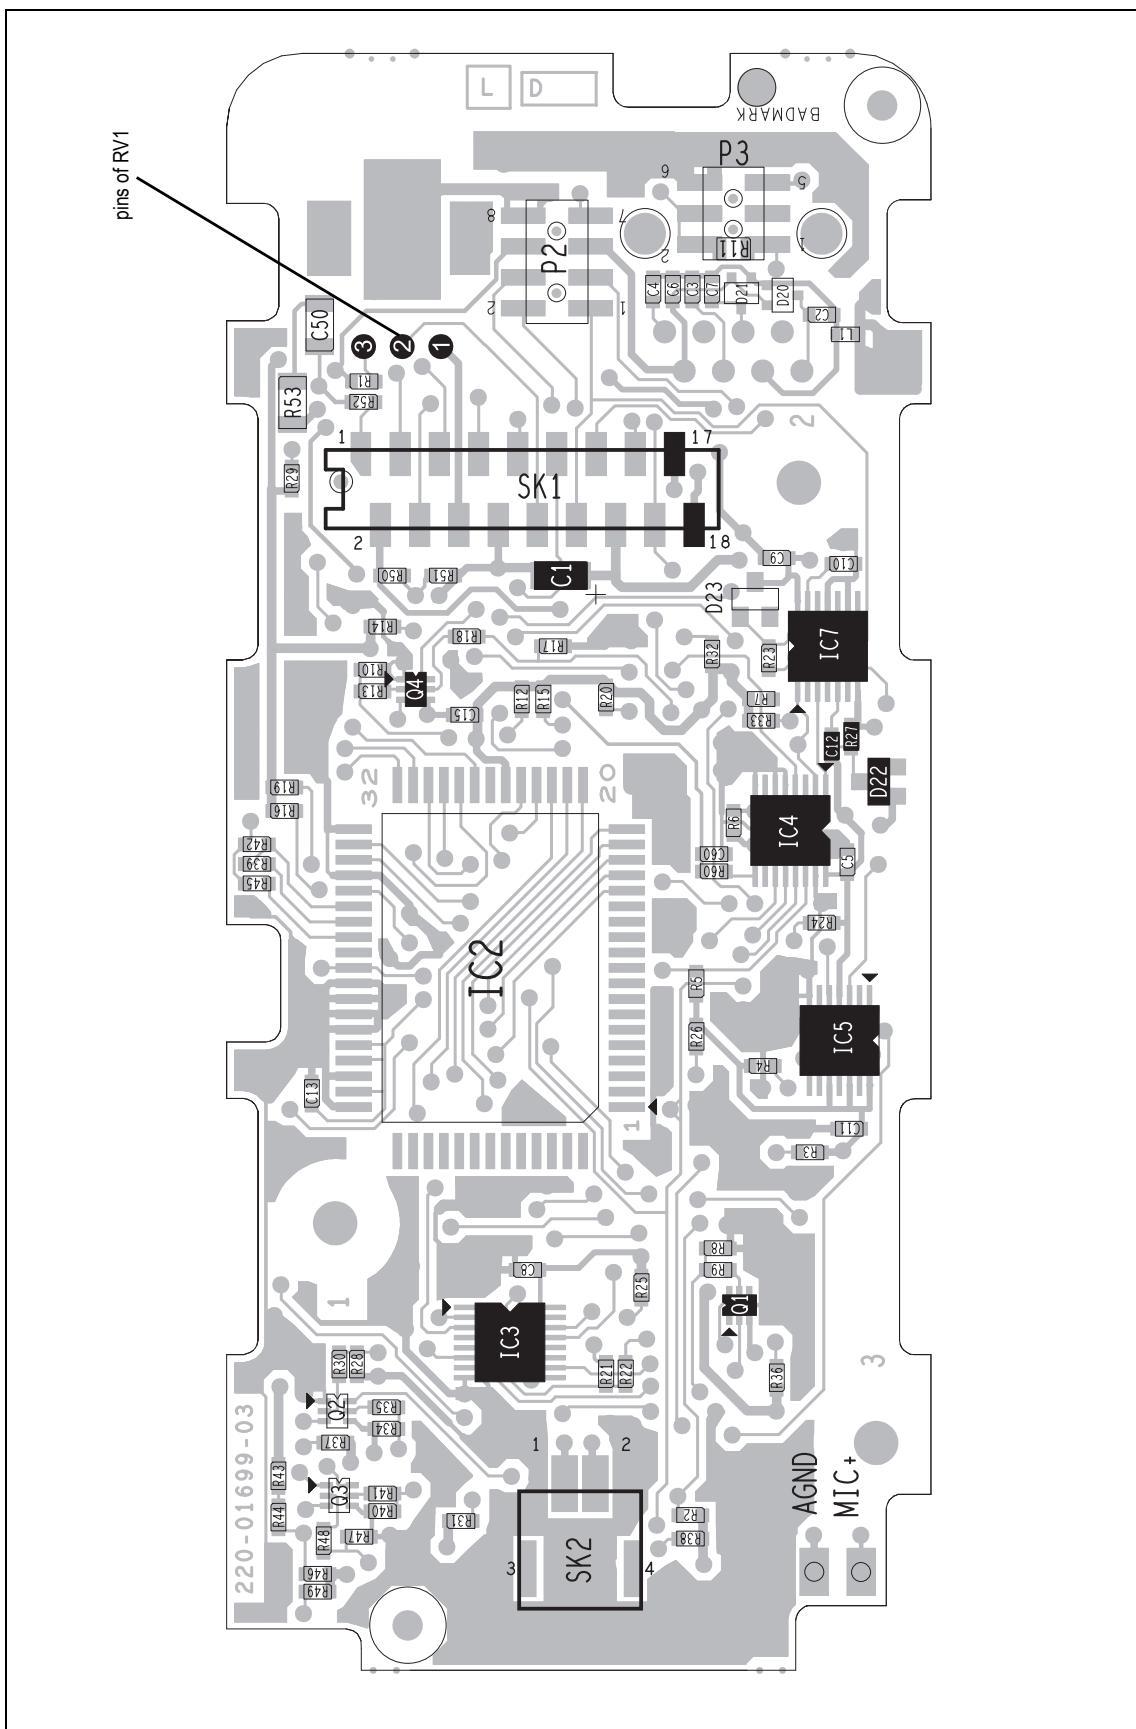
Bottom side of the 2- or 3-digit control-head board
